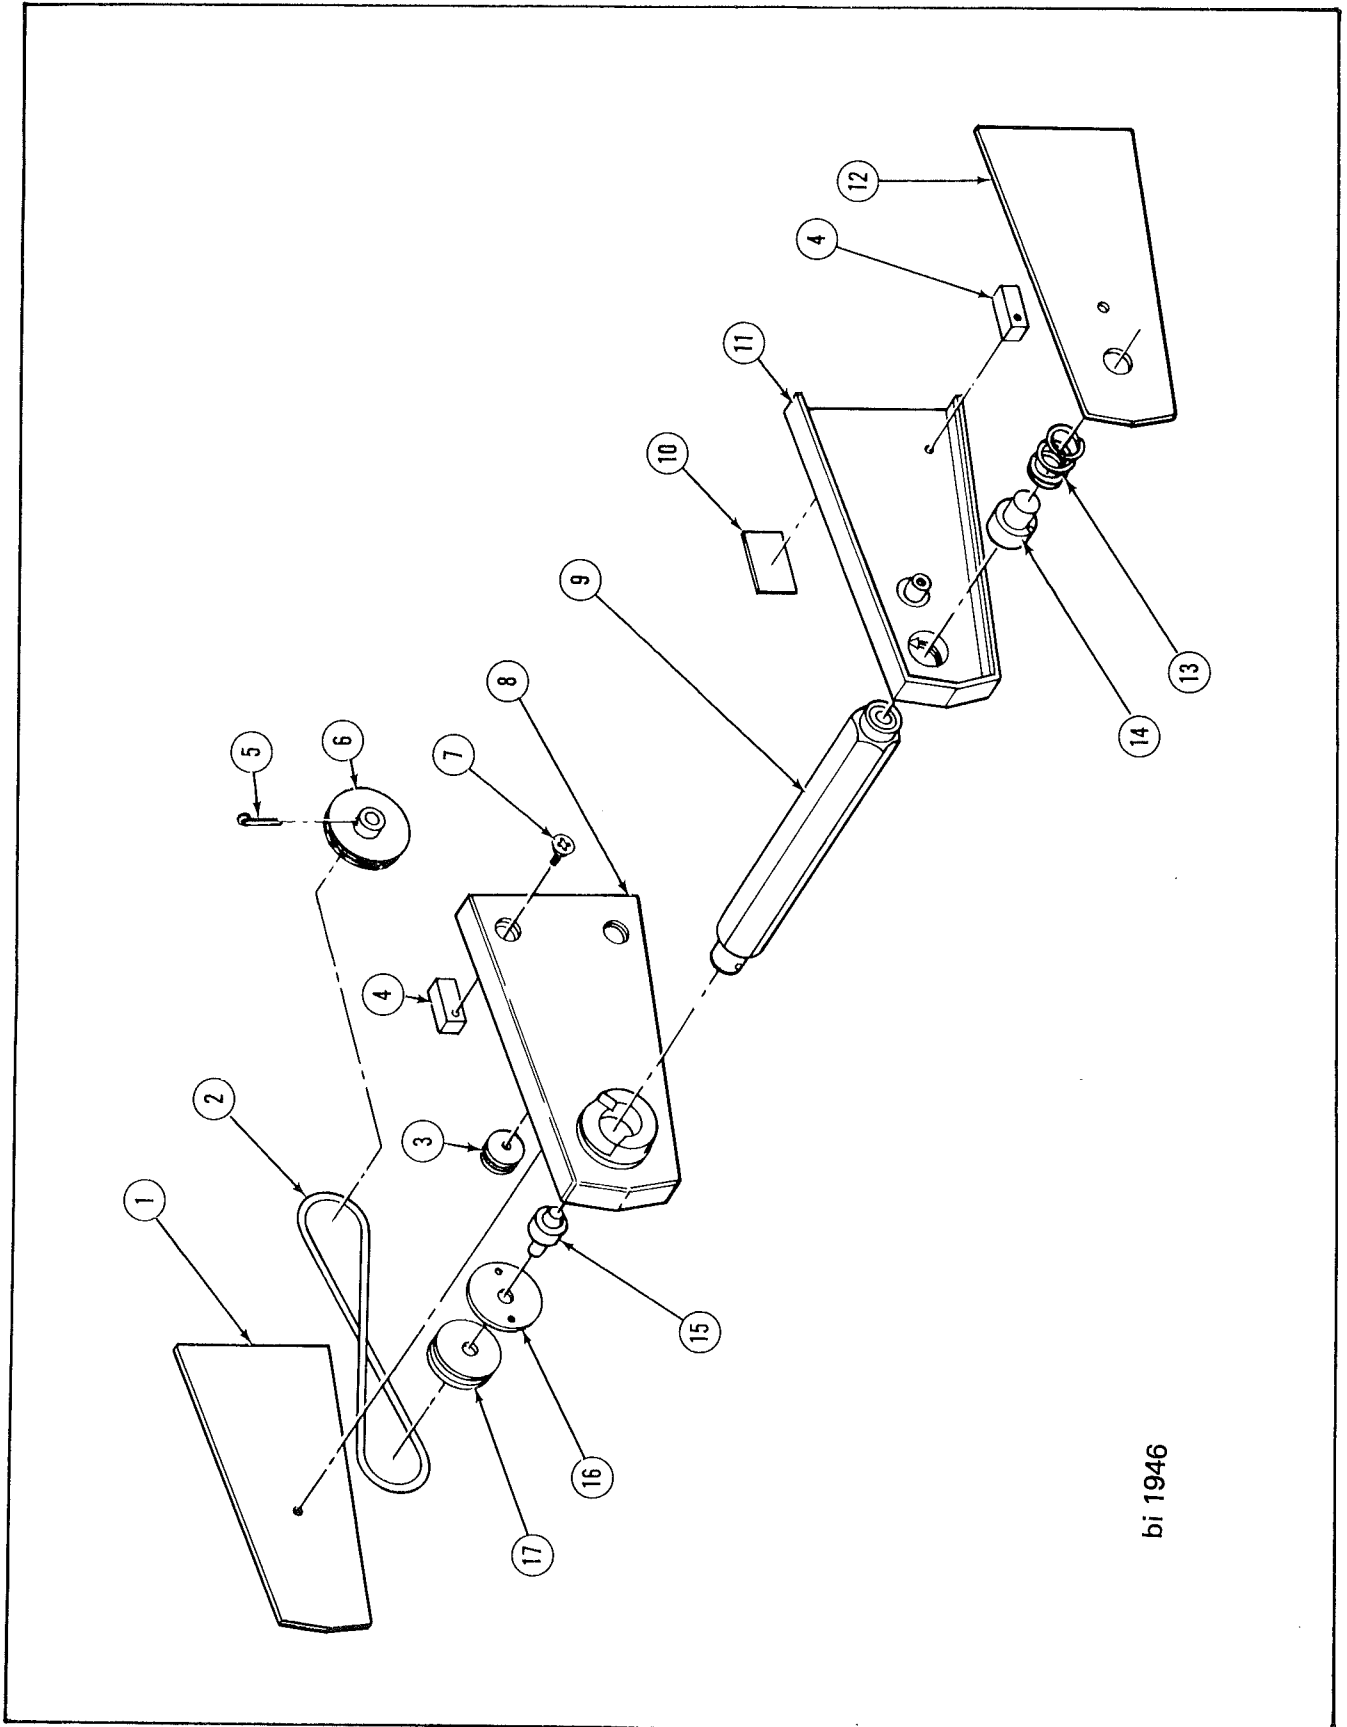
CHART TAKEUP ASSEMBLY
